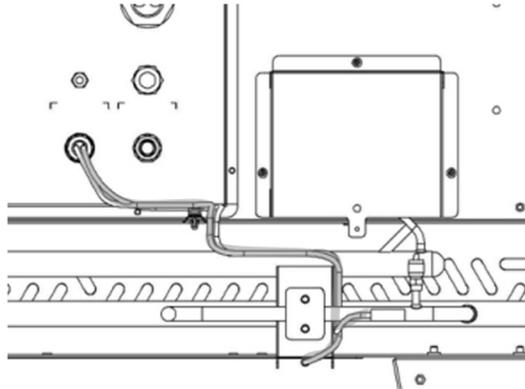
Lock Three Screws at the Bottom)
